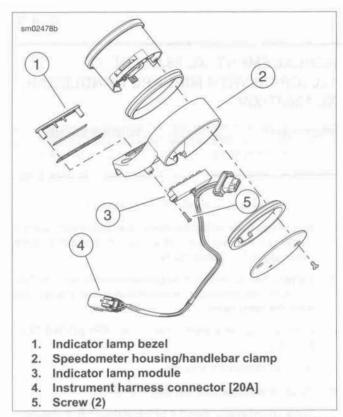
Indicator Lamps: XL 883R/L/N, XL 1200CP/CB w/Mini-ape Handlebar, XL 1200T/X/V
